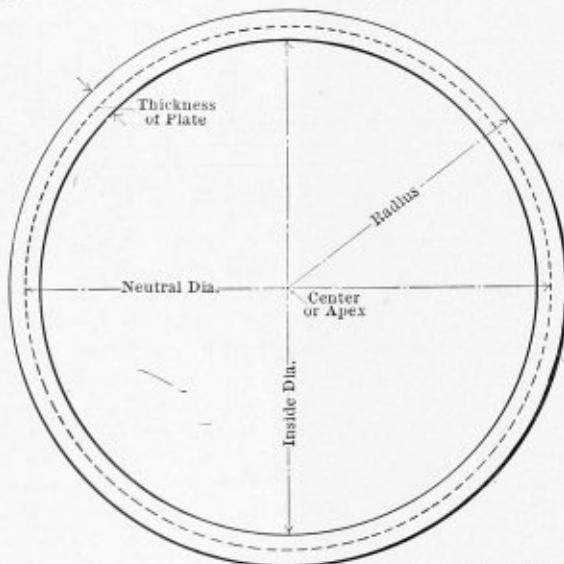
SECTION SHOWING DIMENSIONS OF SHELL PLATE.
